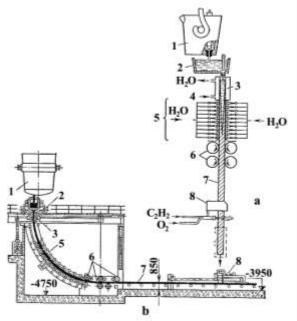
Continuous casting: 1 – stopper ladle; 2 – intermediate ladle (tundish); 3 – water-cooled mould; 4 – water; 5 – zone of secondary cooling; 6 – drawing rollers; 7 – billet; 8 – cutting mechanism
